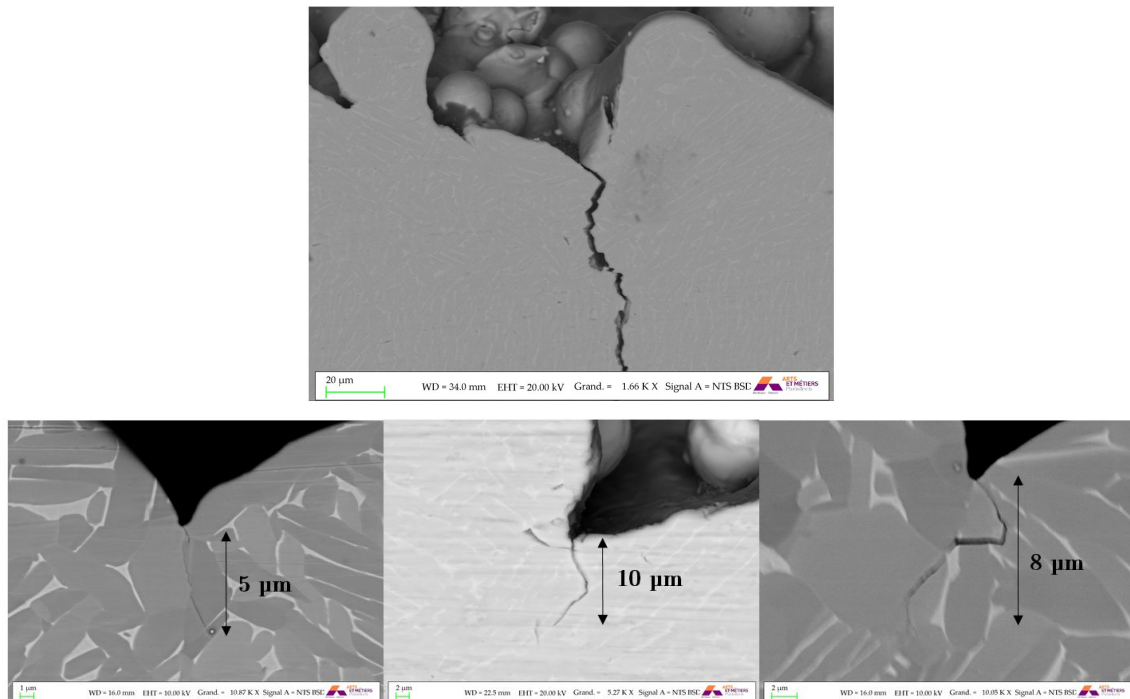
Observations of surface crack initiation on flat SLM as-built specimens tested in tension ( $R=0.1$ ): Main crack and non-propagating cracks.
